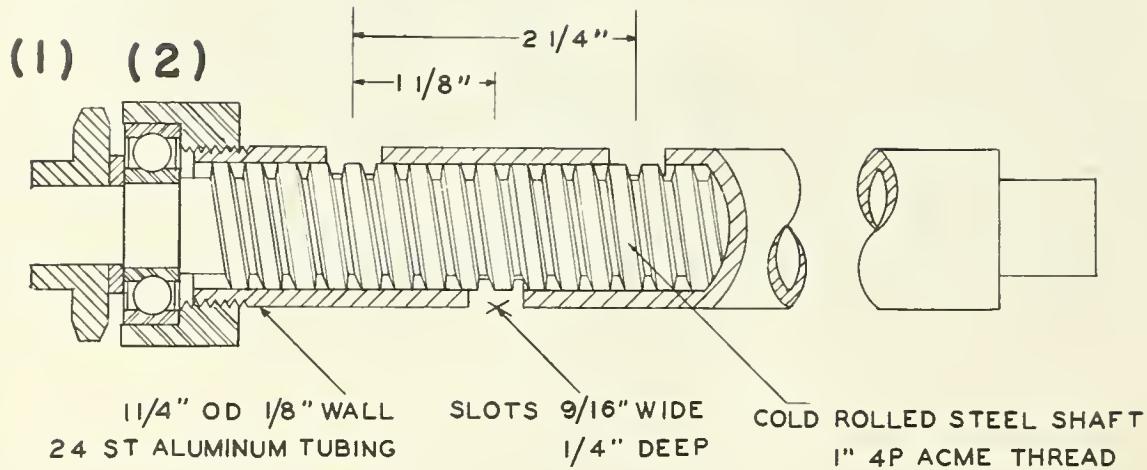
Diagram of auger and slotted tube used as metering device in granular herbicide distributor. (1) Sprocket. (2) Ball-bearing and housing.
